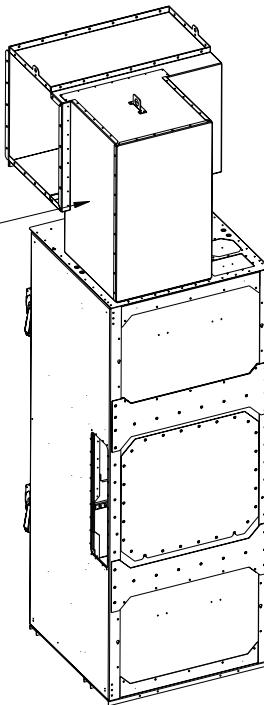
Side and Angle View (36 in. Structure) showing Plenum
